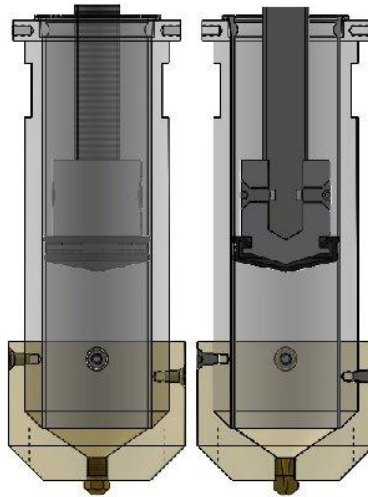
External view and section view of the cylinder, trapezoidal screw and nozzle.
